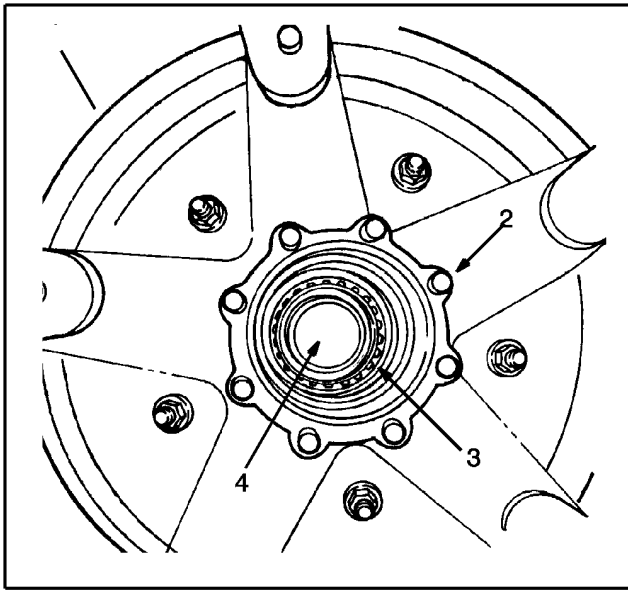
Head-on View of Installing Wheel (Hub) Assembly Using a Wheel Dolly
